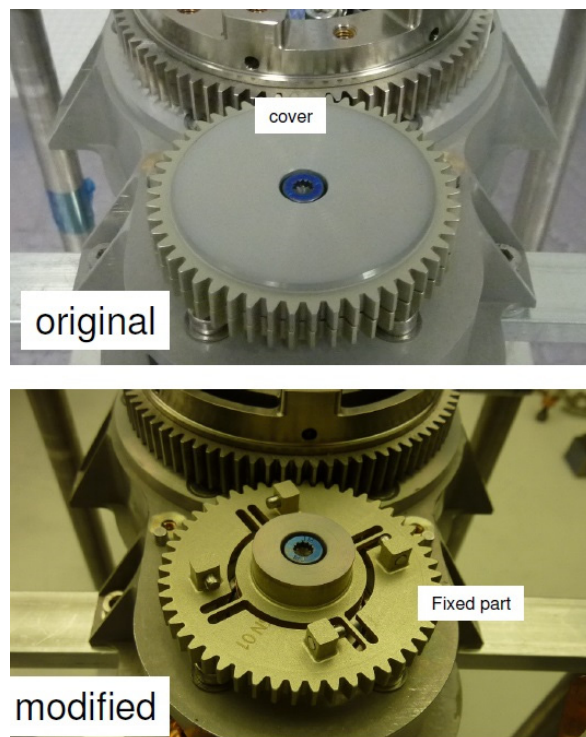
Original gearwheel (top) and modified gearwheel (bottom).
